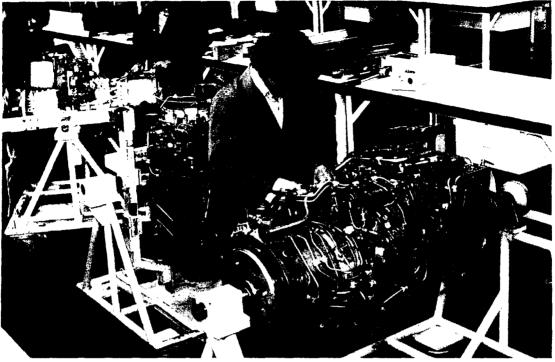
THE GEM ENGINE—'DRESSING' THE ASSEMBLED MODULES
